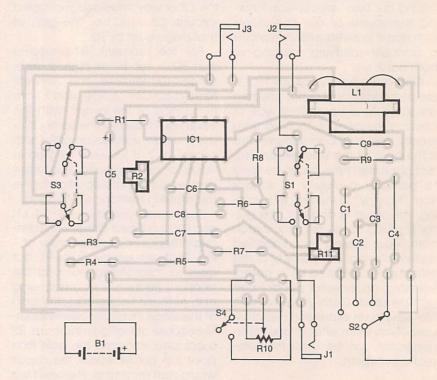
The Wild Mouse is simple enough to be laid out on a single-sided board without the need for jumpers.
